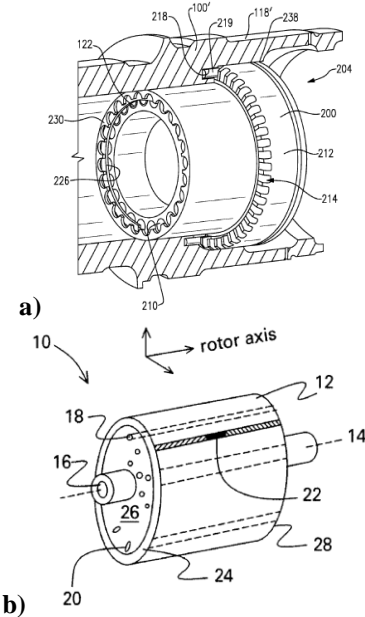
a) Adding material into a) grooves; b) holes [11, 12]
